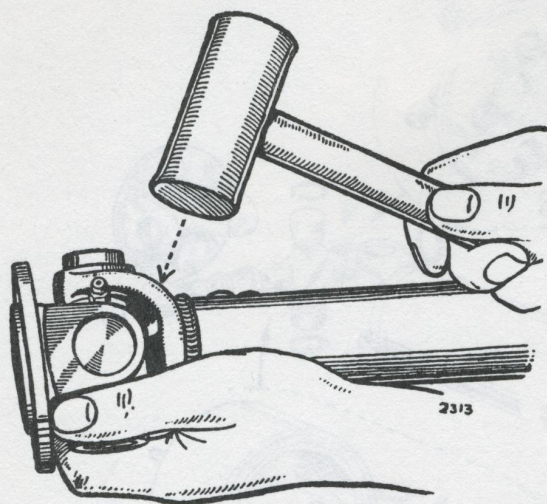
To extract bearings after removal of snap ring, tap on ears of yoke with copper hammer
